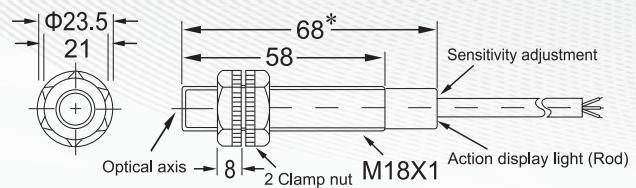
## PHOTO ELECTRIC SENSOR - 18mm (Diffuse & through Beam)
